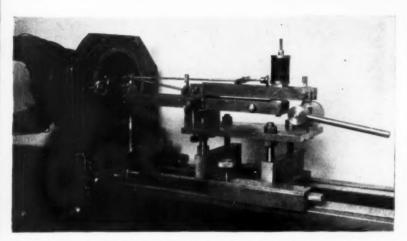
An aircraft cylinder is mounted in a special fixture with the gage in position to make a mark on the cylinder surface. The identation, applied to any desired position on the surface, is of such shape that a relatively small amount of wear will make a definite change in one or more measureable dimensions of the mark. This provides a very accurate indication of wear at the point of the mark.
